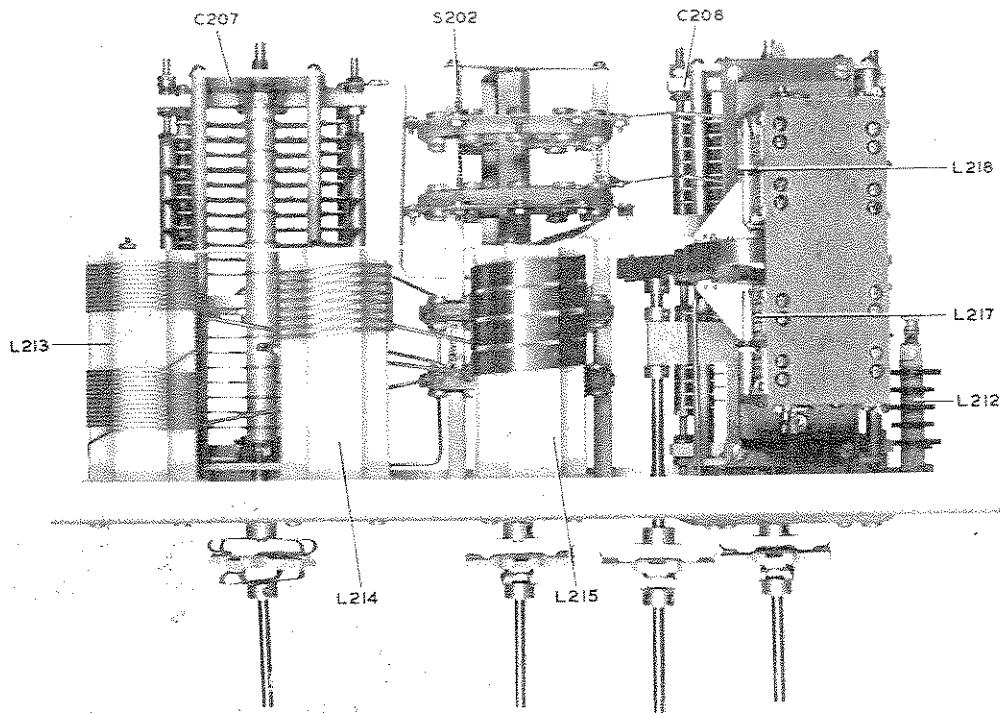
OUTPUT COIL & SWITCH ASSEMBLY, TOP VIEW
